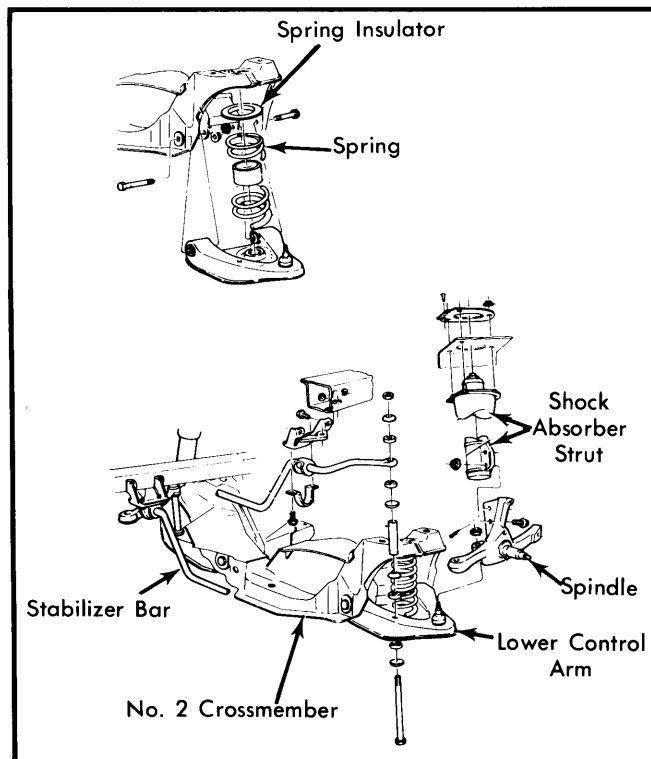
Exploded View of Ford Motor Co. Single Arm Front Suspension Assembly
